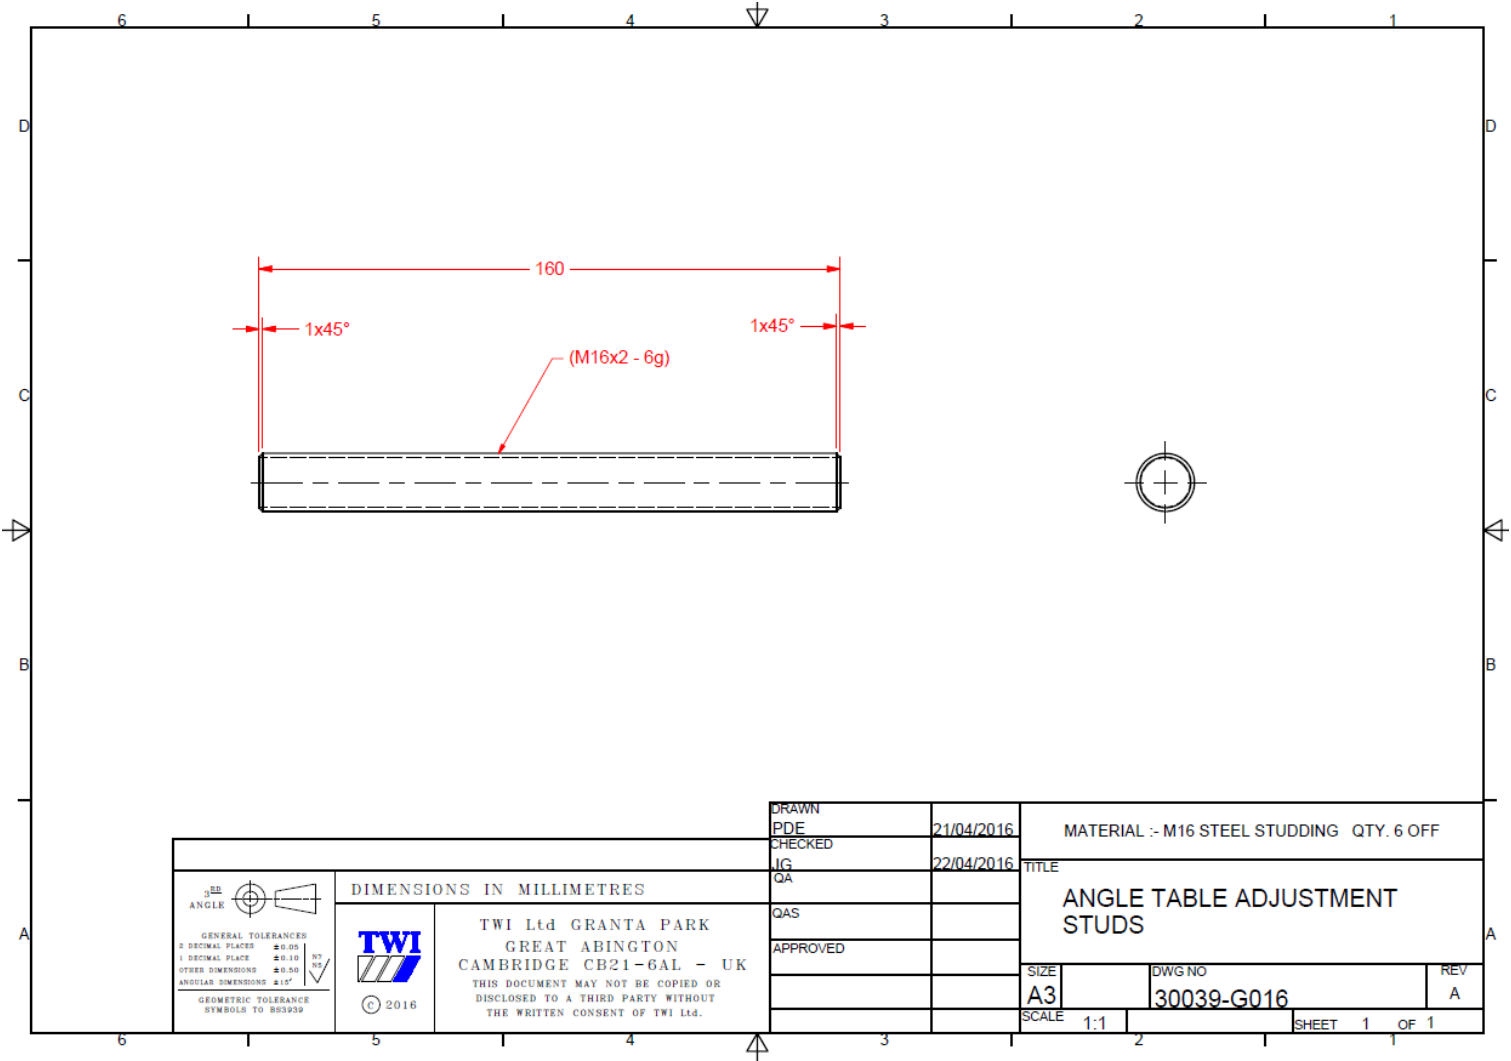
Technical drawing of the adjustment studs of the tilting table
